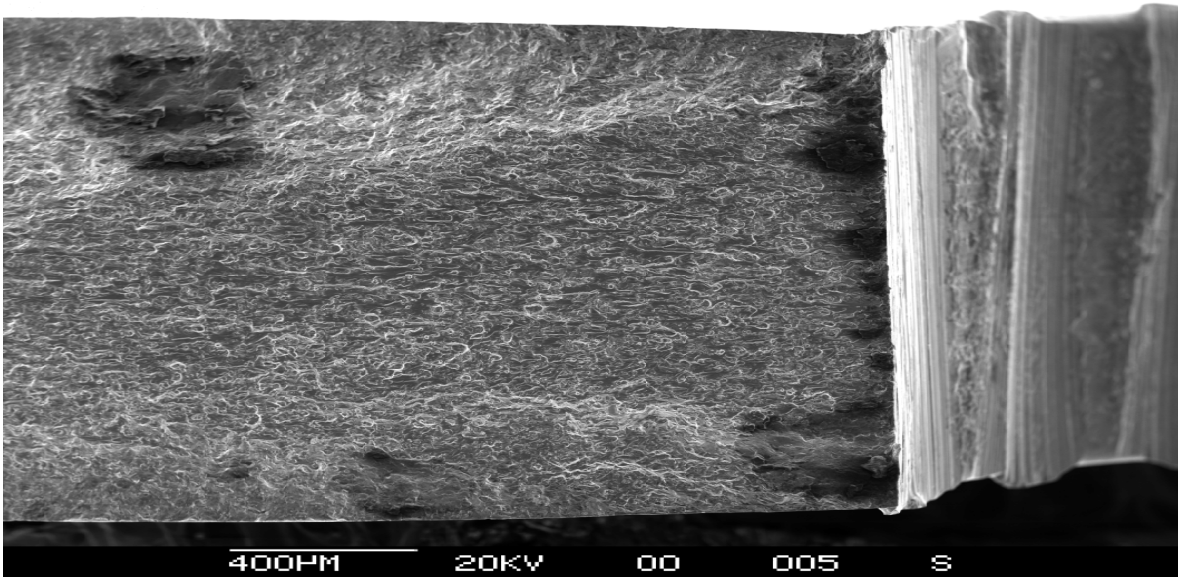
Fracture surface of specimen 2 near the hole showing initial crack.
